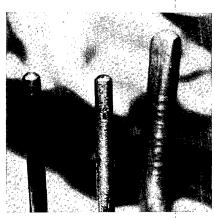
Center rail pin smoothed with sandpaper. Adds undesired friction. Bushing is likely to wear out quickly. Pin must be replaced.
